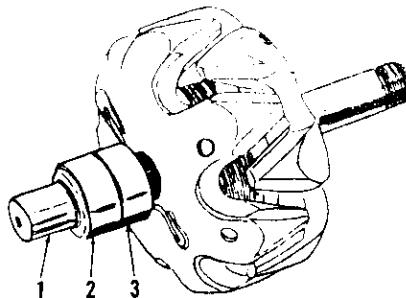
Removed rotor assembly showing test points when checking for grounds, shorts and opens.
